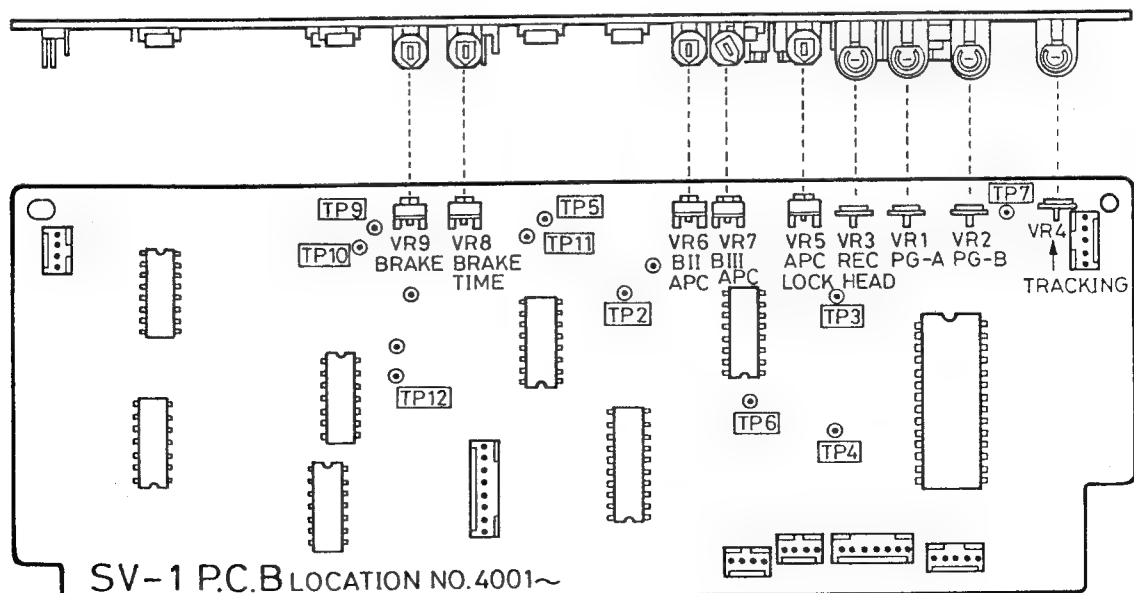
Circuit Board SV-1 (Parts side view)
